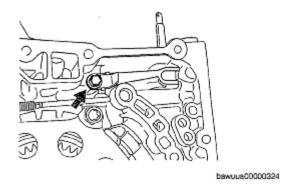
Identifying Detent Spring Bolt Courtesy of MAZDA MOTORS CORP.
